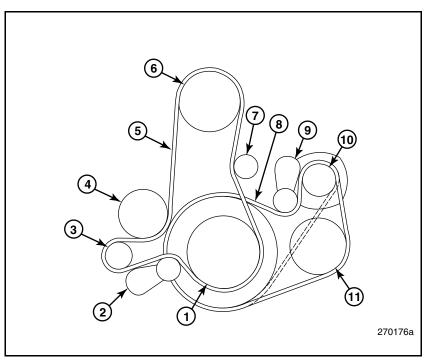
Drive Belt Routing — MP7 and MP8 Engines
